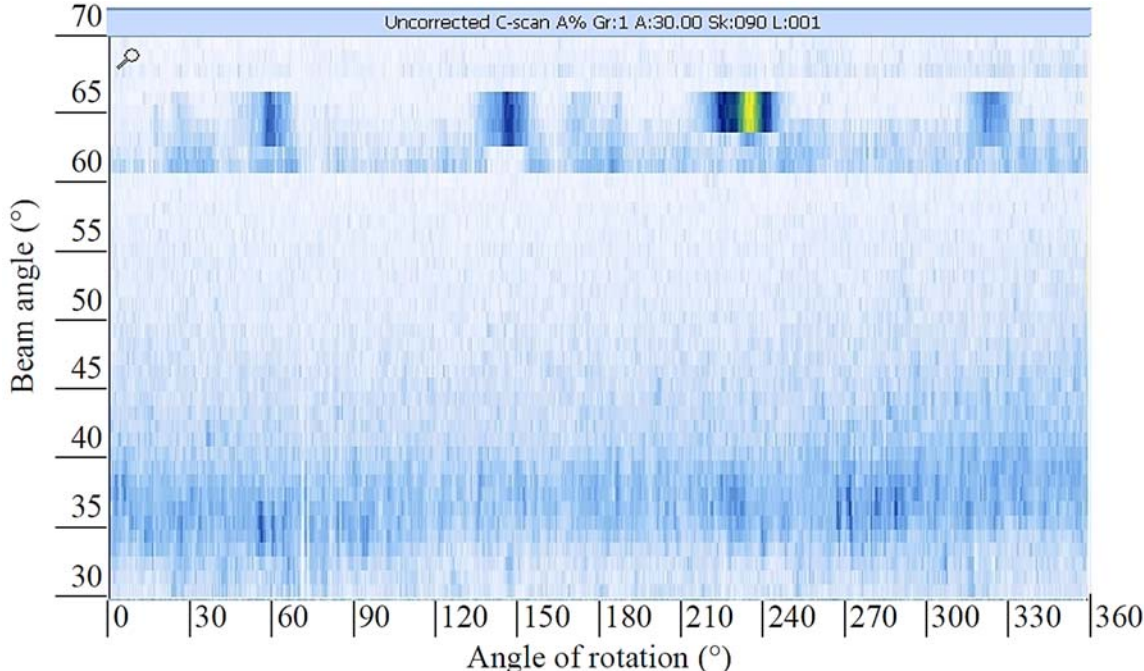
C-scan of a cracked axle (left side of journal) using a chain scanner
